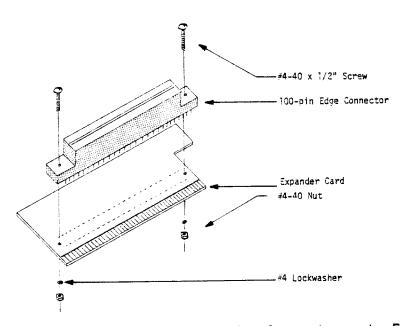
A. Installation of 100-pin Edge Connector onto Expander Card
